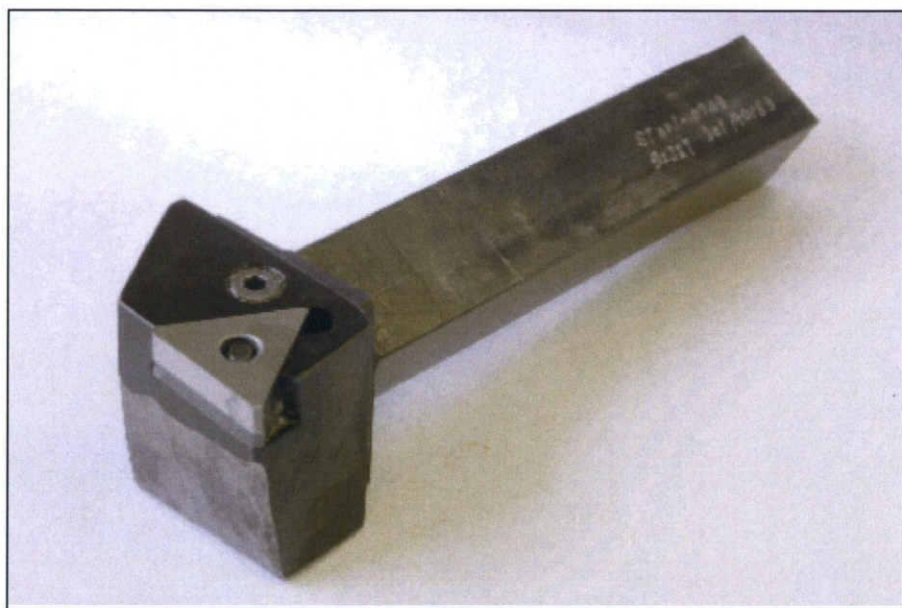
Photograph of oblique cutting tool ( $i=60^\circ$ )
